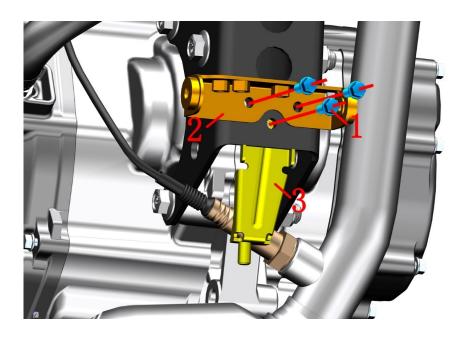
COOLING SYSTEM COMPONENT		Oil cooler component 2	CHK	Q
